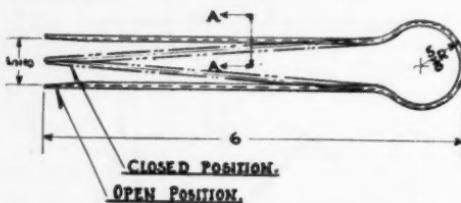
Drawing of loading pliers used to place blanks in the benders and sizing dies.
